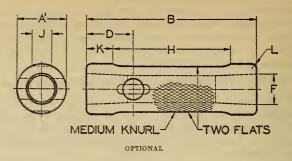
Plug gage handles, Nos. 000 to 0, inclusive
